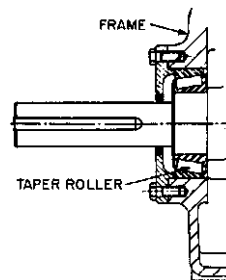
The main bearing mounted directly in the frame (Flowsolve Corporation)
